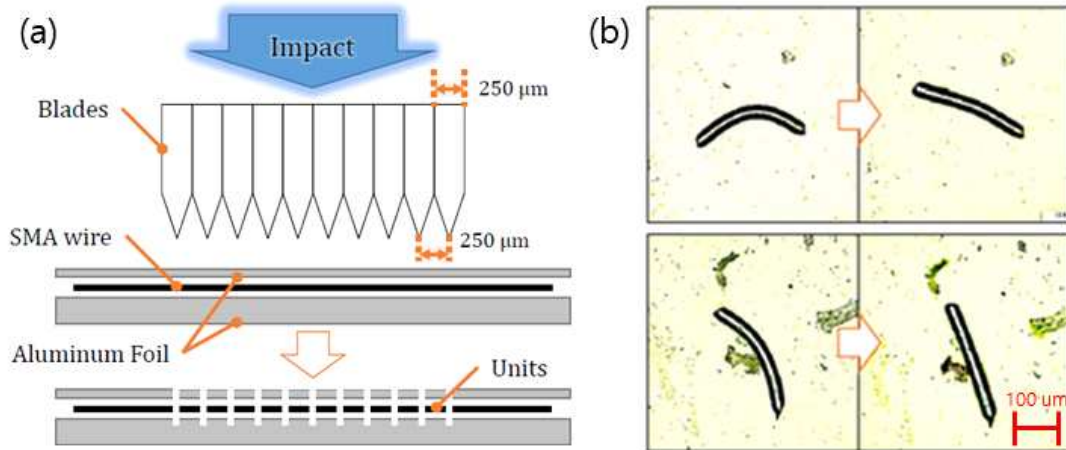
Fabrication process of Ni–Ti unit. a) chopping Ni–Ti wire using a cutter with distance between the blades, b) annealing process
